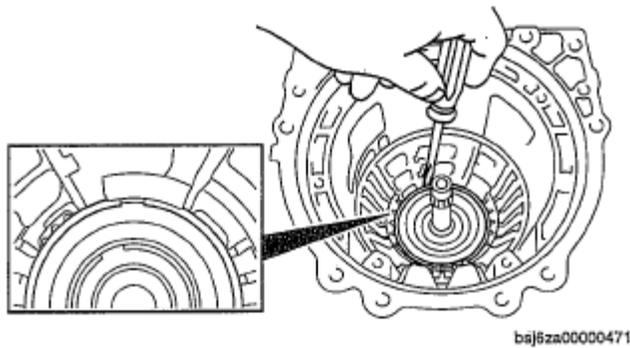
Removing Snap Ring Using Flathead Screwdriver
